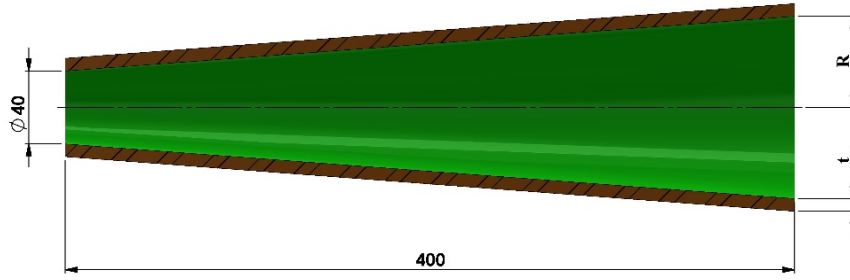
Section view of the truncated hollow cone representation for optimizing spindle shaft design
